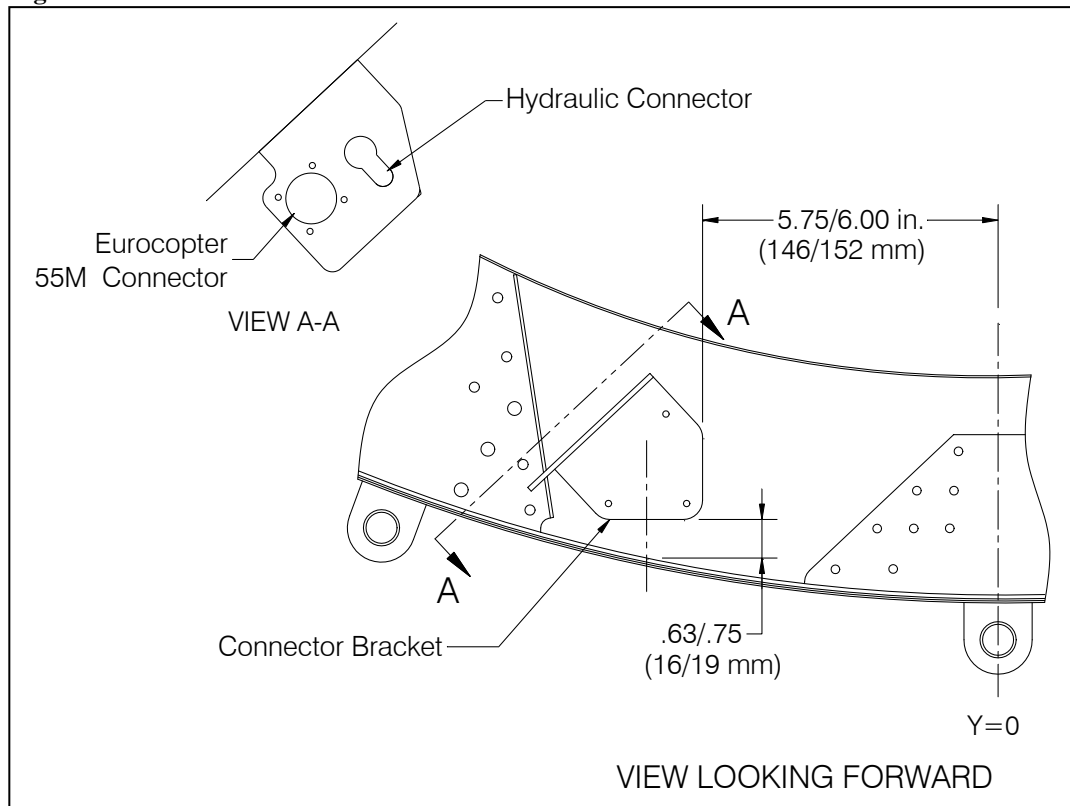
Hose Routing through Rear Cabin Bulkhead
